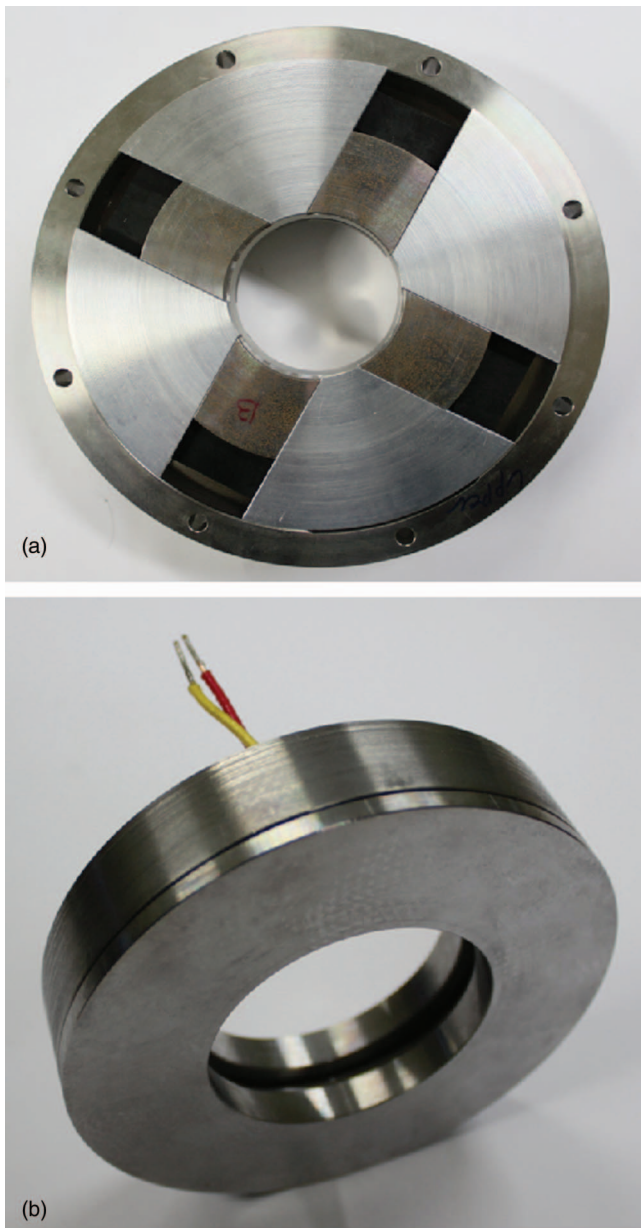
Fabricated magnetic bearings. (a) Radial magnetic bearing; (b) Thrust magnetic bearing.
